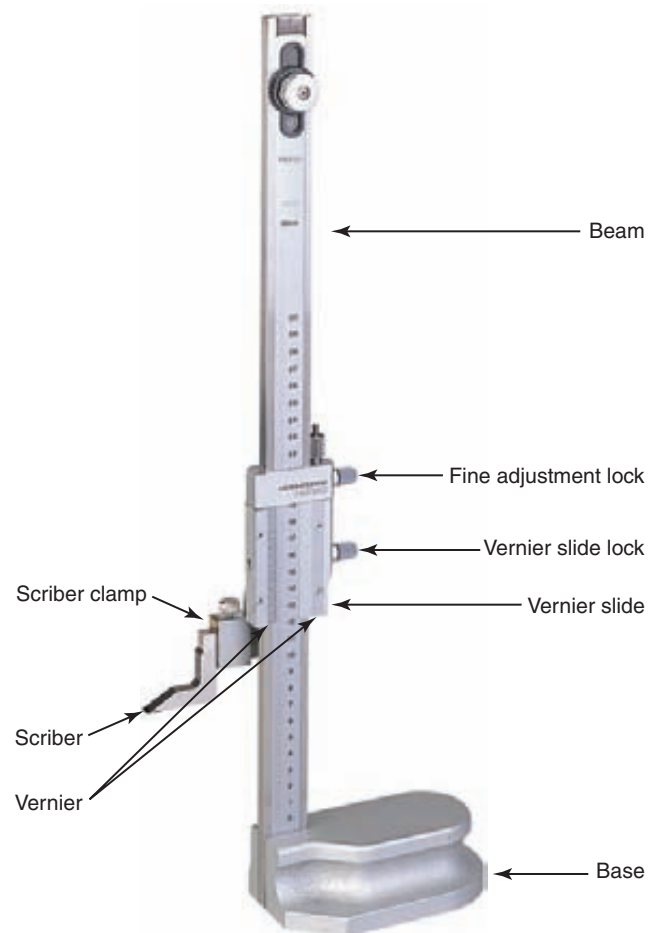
Parts of the vernier height gage (Mitutoyo America Corp.).
